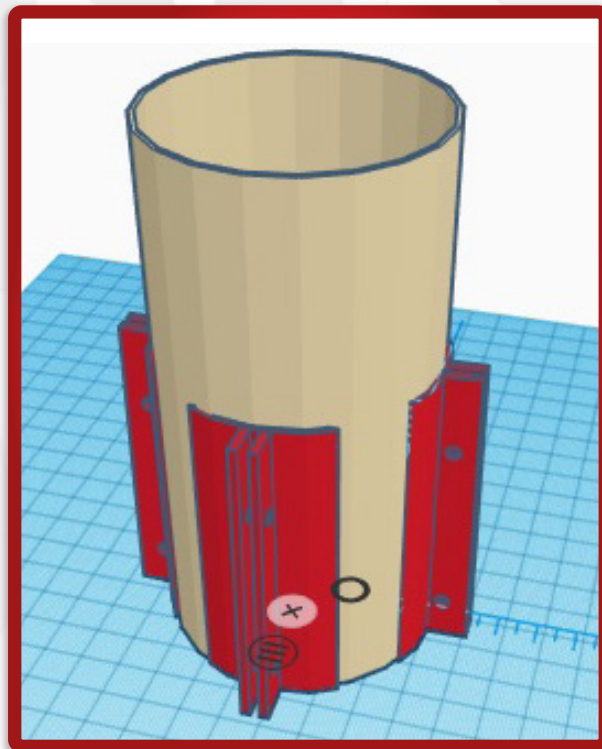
FIN RAILS MOUNTED ON BT-80 TUBE
